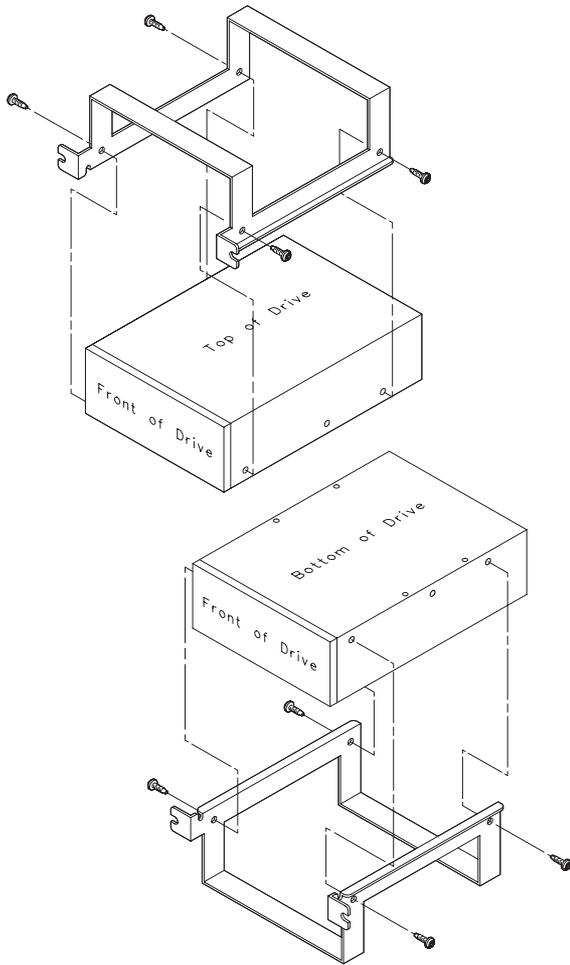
Replacing Hard Drive Mounting Bracket and Drive Orientation
